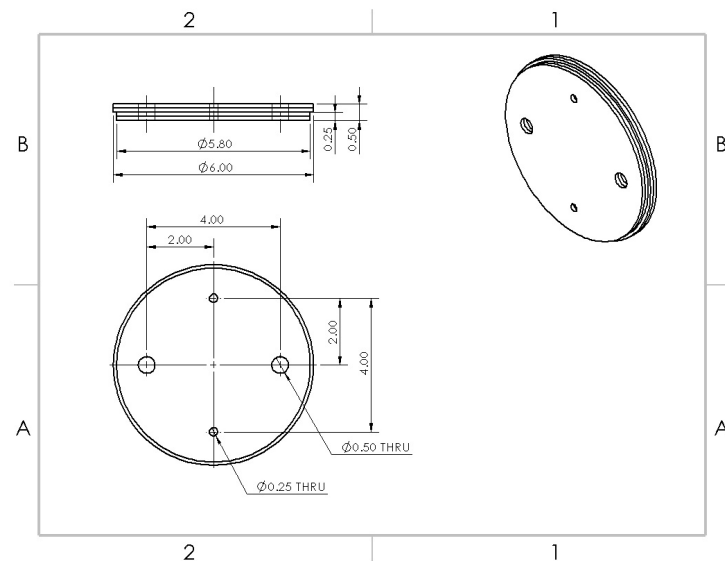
Dimensioned drawing of the payload bay aft bulkhead.
